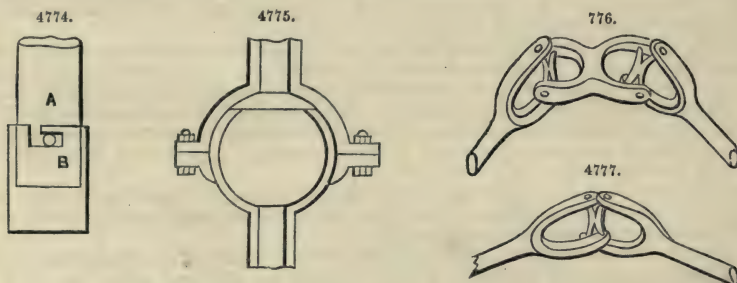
, a ball-and-socket joint arranged for tubing. Figs. 4776, 4777, two kinds of universal joints.
